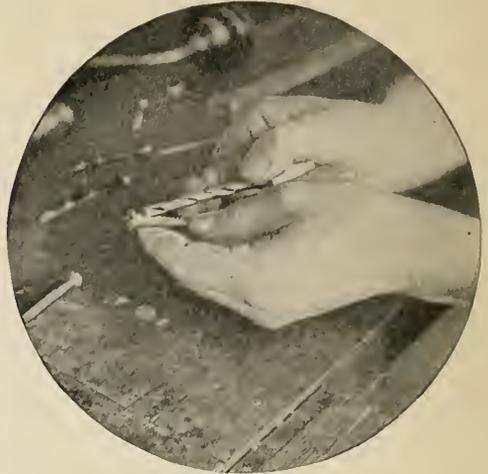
Placing the bit on the shank of the screw to obtain the correct size before boring.
